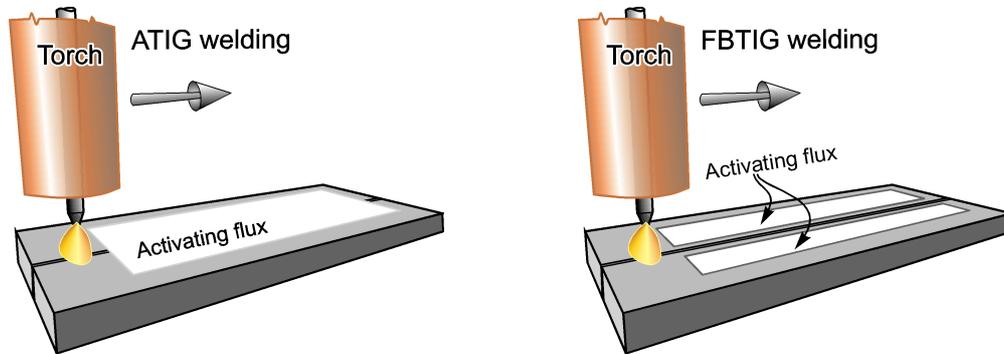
Schema of ATIG welding and FBTIG welding
